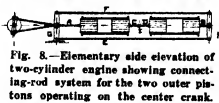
Elementary side elevation of two-cylinder engine showing connecting-rod system for the two outer pistons operating on the center crank.
